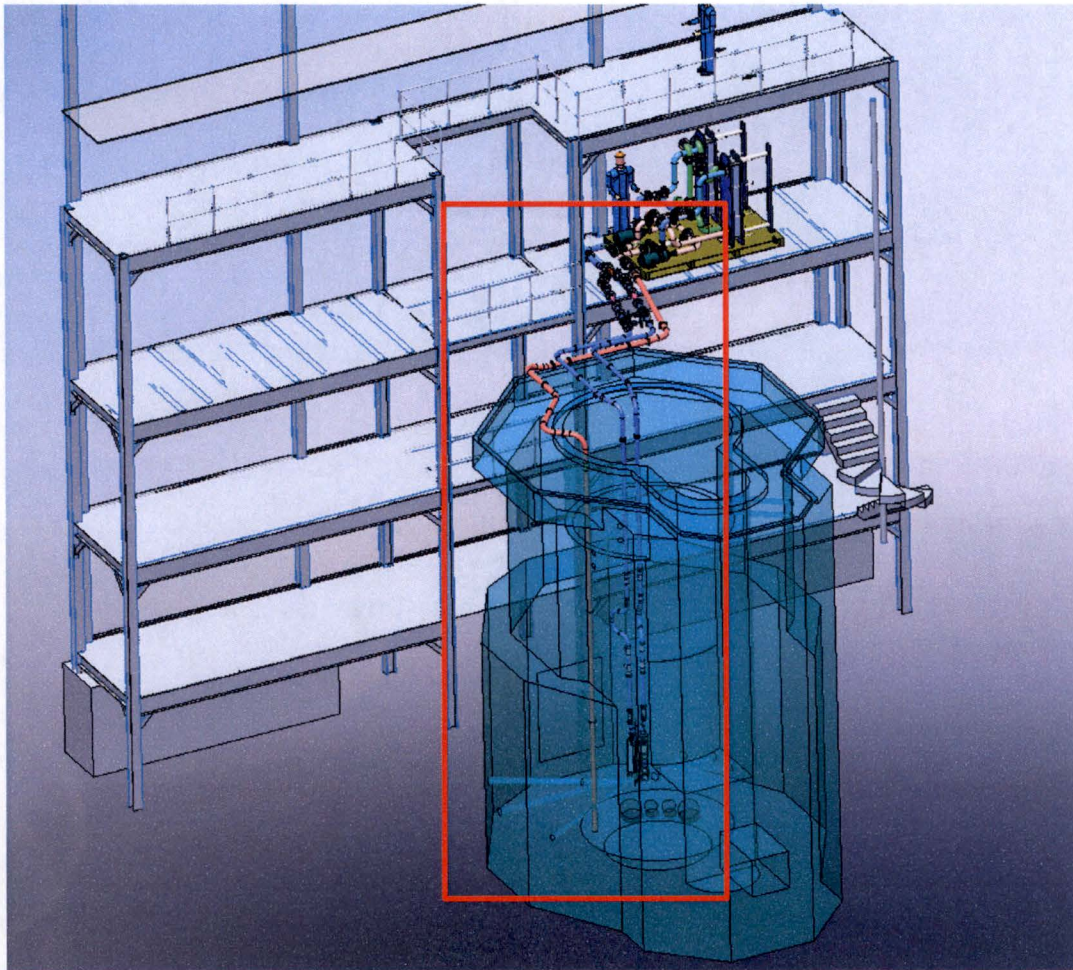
Solidworks Assembly (Red Box is the piping of interest)
